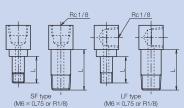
Grease fitting and tube fitting Standard lubrication accessory is B type
